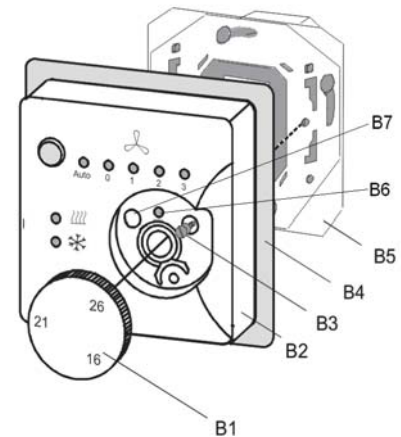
Mounting the Fan-Coil Unit Operator Panel
